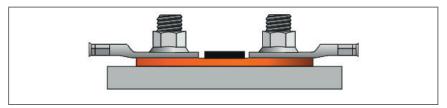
HV BM 1.2+S, power cable HV-, fastening the ring terminals with the M8 nuts
